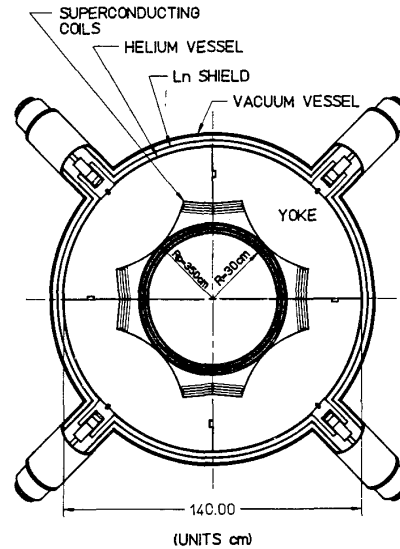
CROSS SECTIONAL VIEW OF Q2/Q3, SHOWING INNER AND OUTER CRYOSTAT. POLE RADIUS = 35cm
